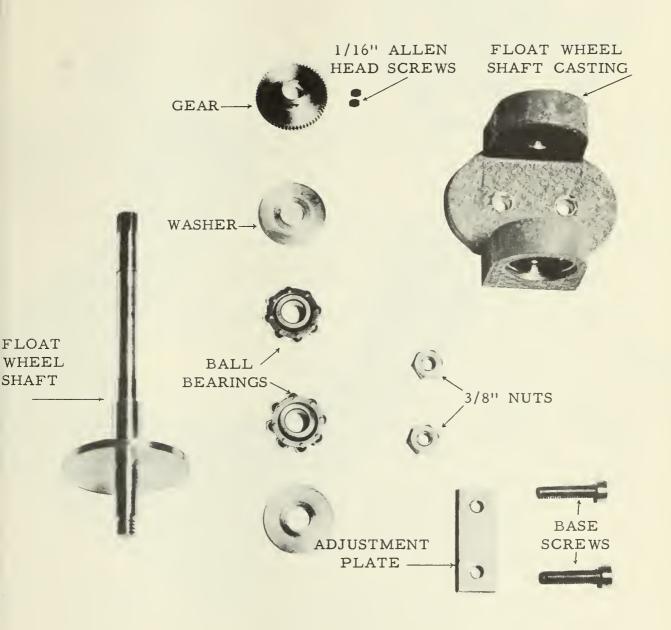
Type B. Float wheel shaft, detail of parts.
